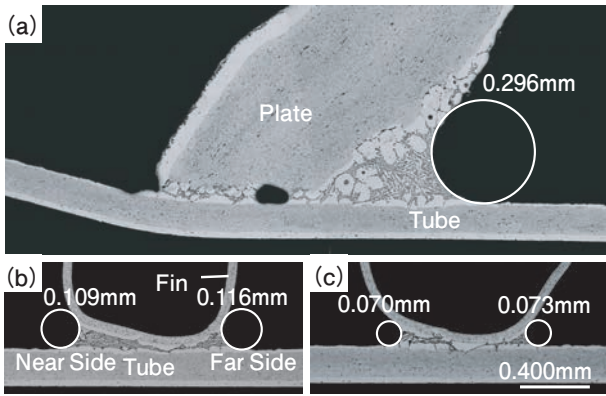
Cross sections and curvature radii of fillets at joints. (a) Plate-tube joint. Fin-tube joints located at (b) 15.5 mm and (c) 200.0 mm from the plate-tube joint.
